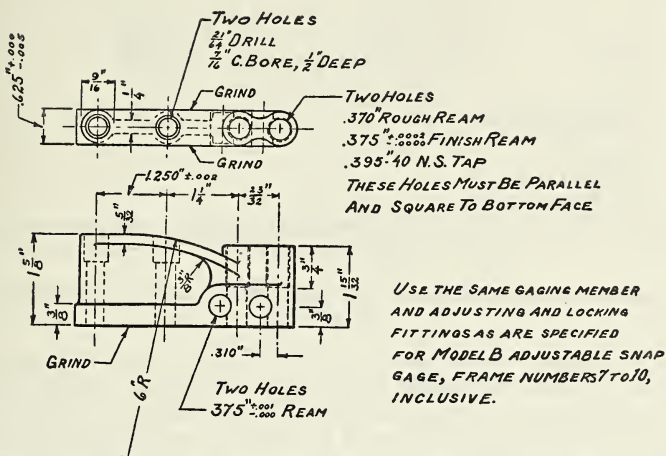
American Gage Design Standard adjustable length gage, detail of length gage head, progressive model.
